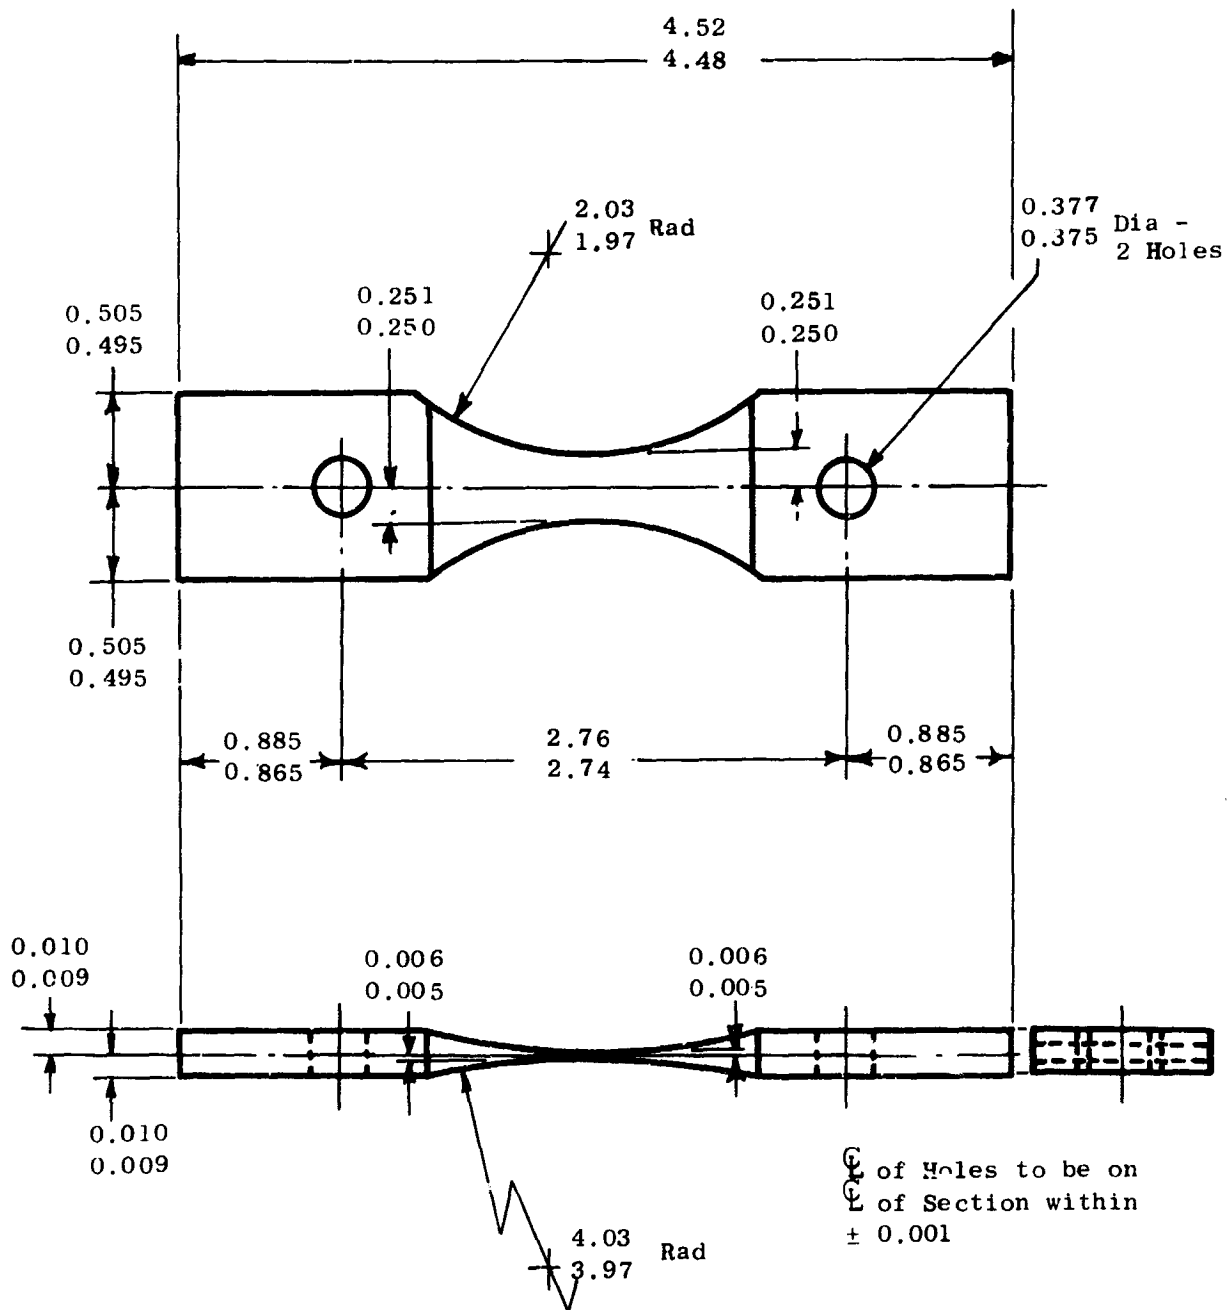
Plate Specimen - Udimet 700 Parent Metal
